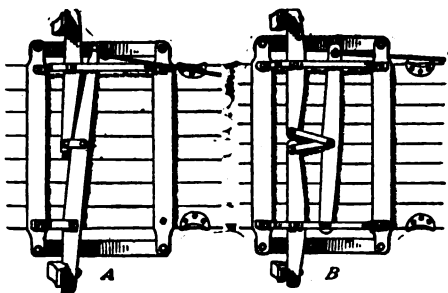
Bottom views of two types of brakes: *a* joint box brake; *b* three-piece box brake
